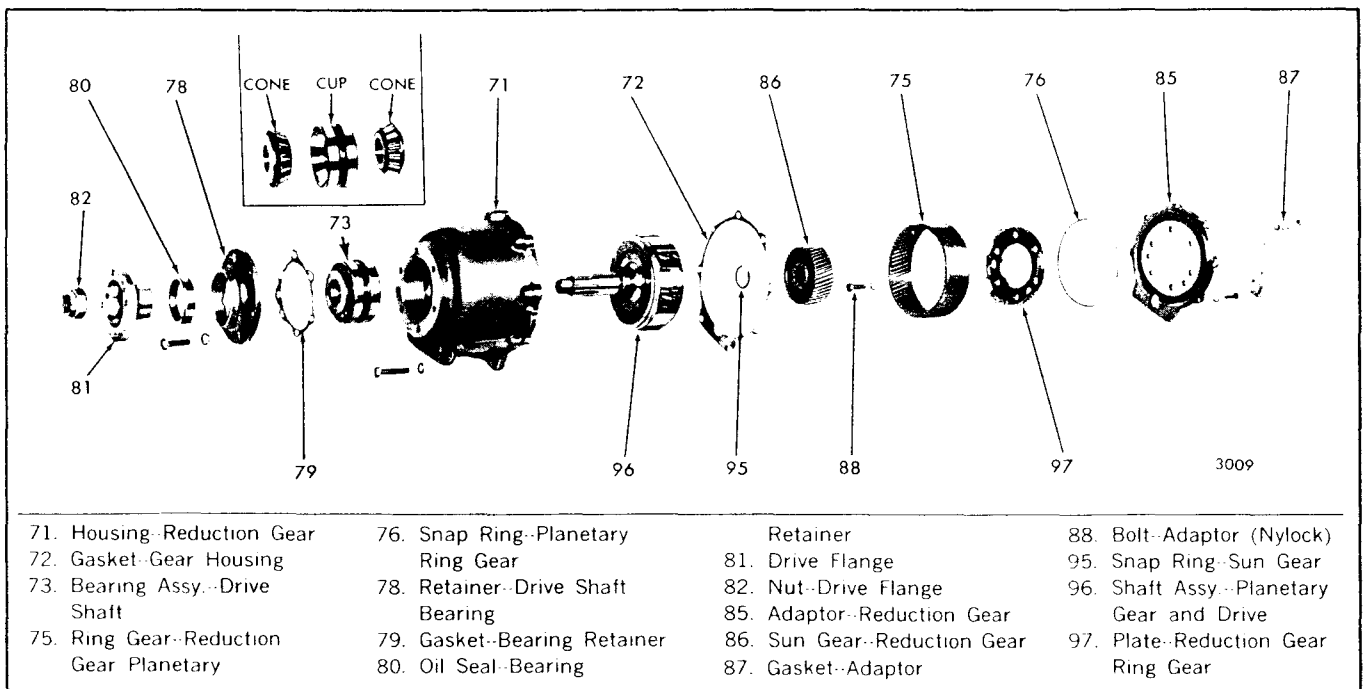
Reduction Gear Details and Relative Location of Parts (2.5:1 and 3:1 Ratios)
